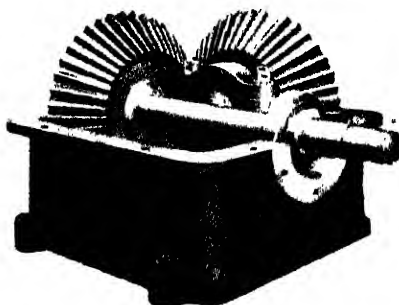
BEVEL GEARING. Two shafts with conical gear wheel at right angles.
